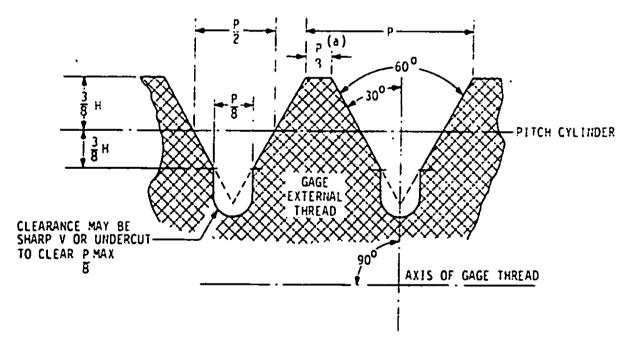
C.2 Internal thread profile with truncated flanks for thread gages
